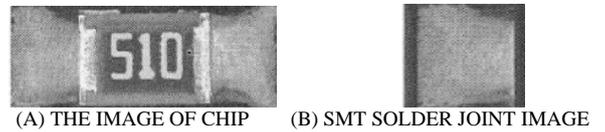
FIGURE IV. THE IMAGE OF CHIP AND SOLDER JOINT
